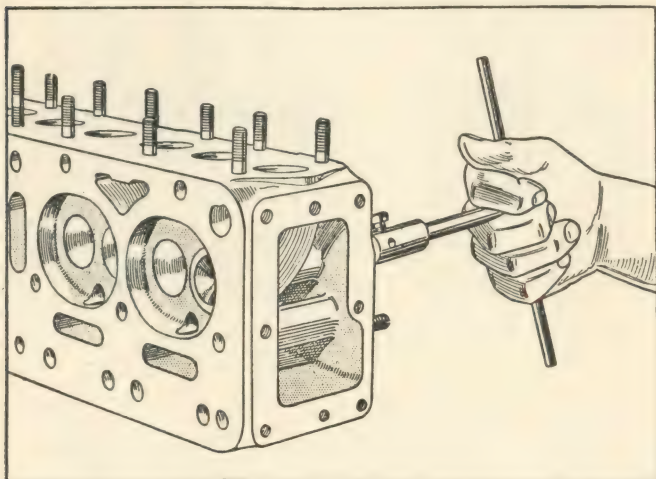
REGRINDING OVERHEAD VALVE (ARMSTRONG-SIDDELEY)
